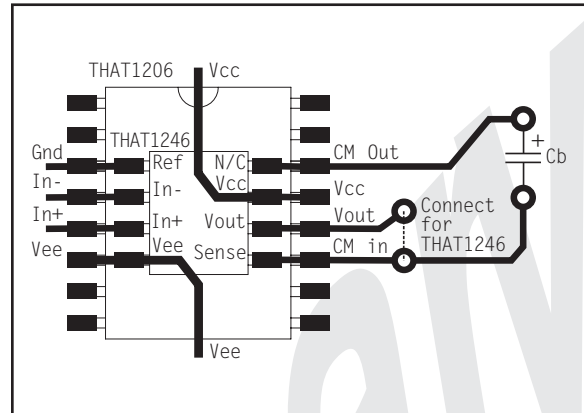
Dual PCB layout for THAT 1206 and THAT 1246 Surface mount versions
